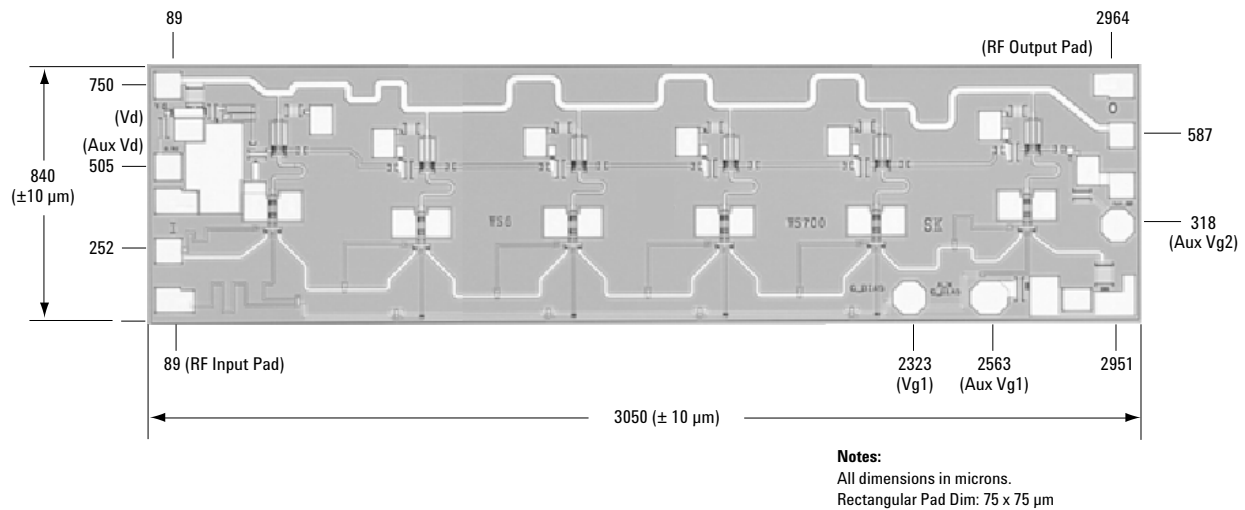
AMMC-5026 Bonding Pad Locations. (dimensions in micrometers)
